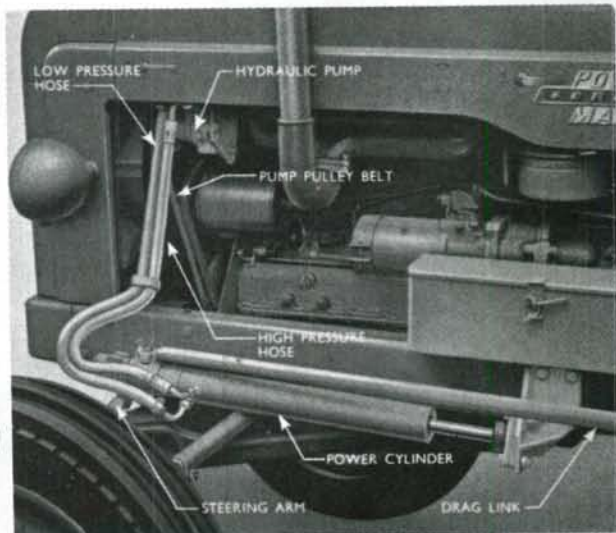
View showing power steering components on model "FPM" with wide adjustable front axle. Power steering systems for other models (including tricycle front end) are similar.
